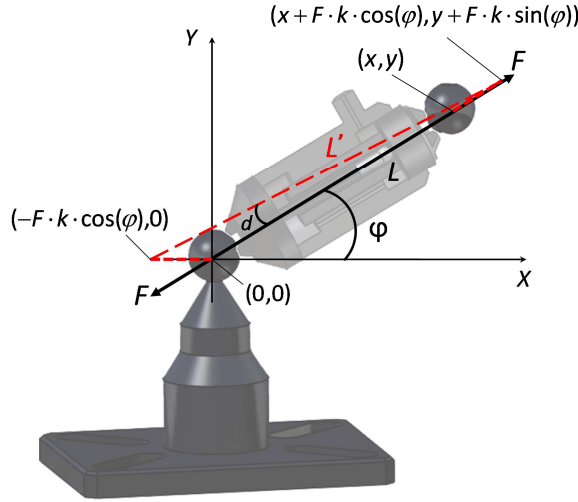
Horizontal machine tool: deflection in spindle and table joint during measurement in Y-X plane.
